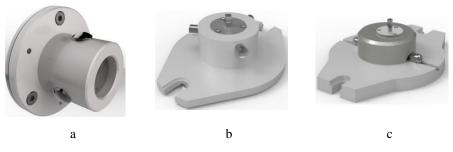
Adjustable locating modules for locating of parts according to internal cylindrical surfaces.
